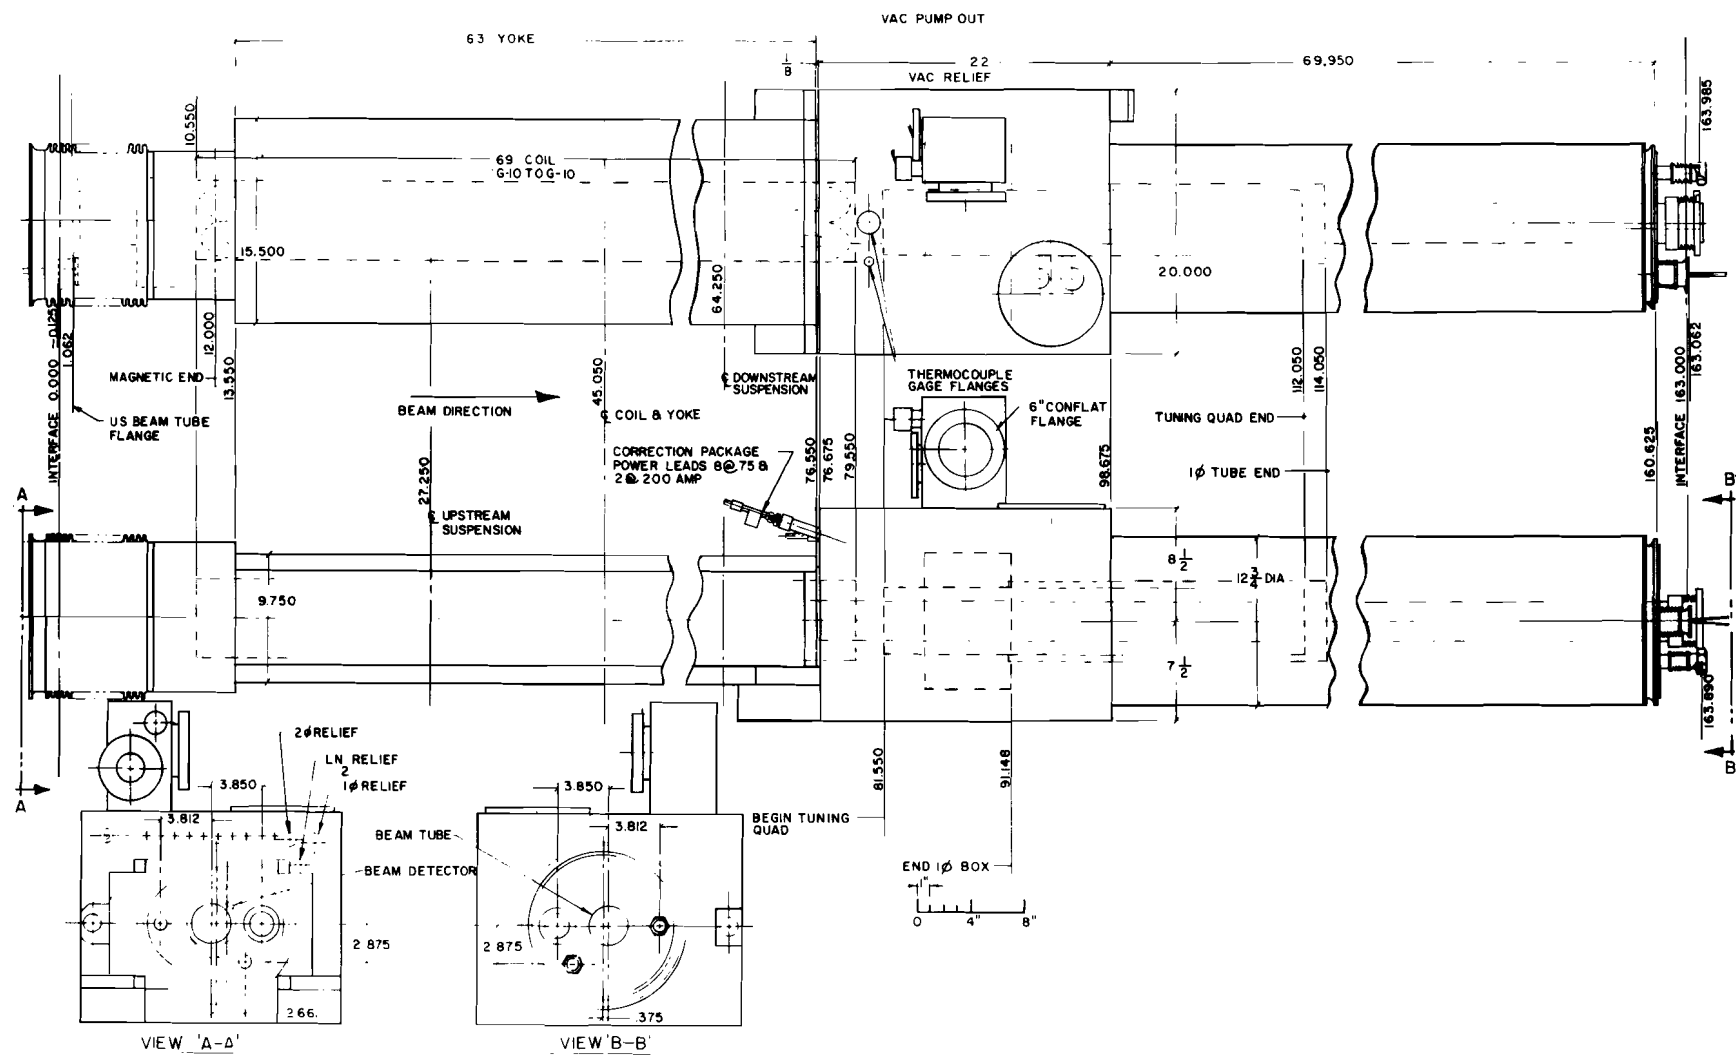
Cross sections of quadrupole and spoolpiece assembly.
